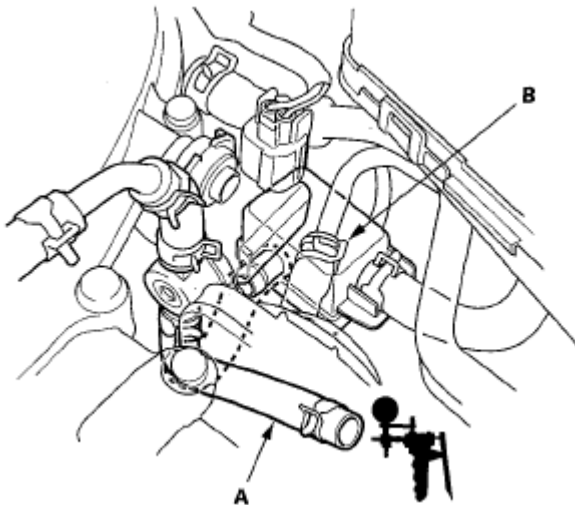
Identifying Vacuum Hose And EVAP Canister Purge Valve Joint
